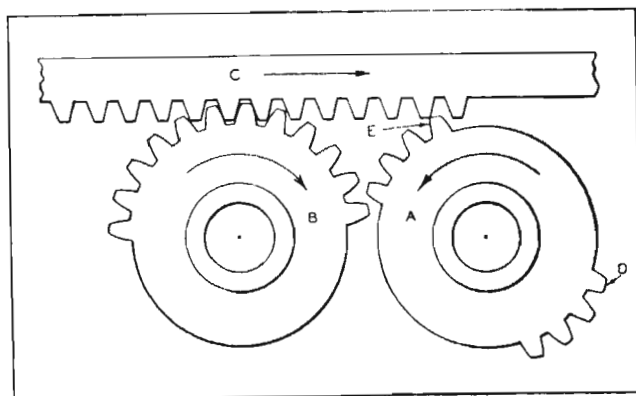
Mechanism for Transmitting Uniform Reciprocating Motion to Rack *C* from Rotating Intermittent Gear *A*.
